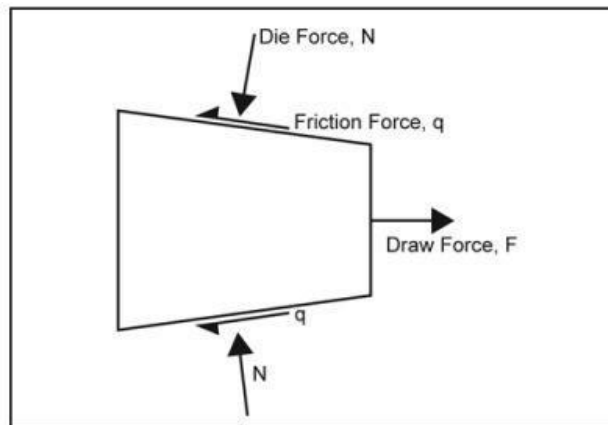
Free body diagram showing the primary forces operating in wire drawing.
